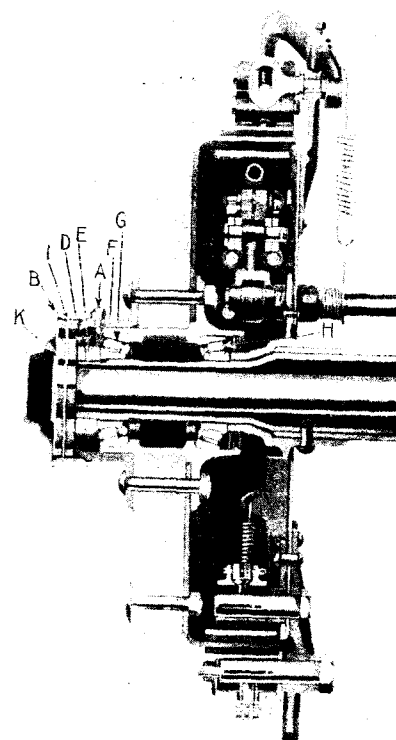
Sectional View of Rear Hub, Showing Bearings
